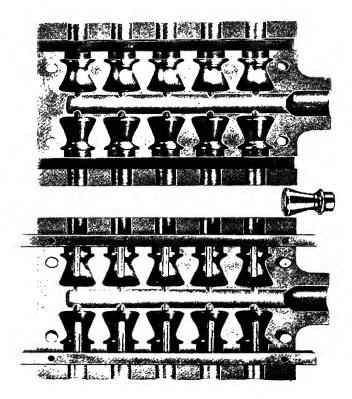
Unit-construction hand mold for injection molding of brush handles. Note two shank bars carrying pins, upon which wooden cores are mounted. Note lateral porting, permitting entering plastic to assist in holding core in place.
